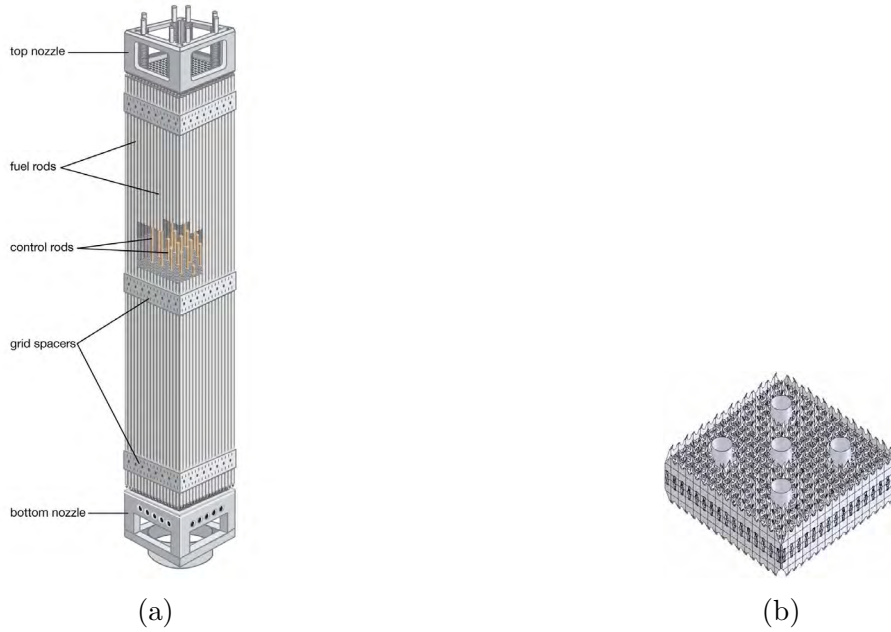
PWR fuel assemblies design: fuel assembly (a) and spacer grid (b).
